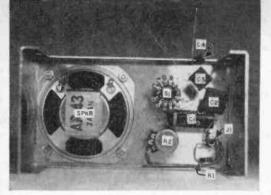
Begin the wiring after placing the parts as shown in the photograph. Solder all connections.
